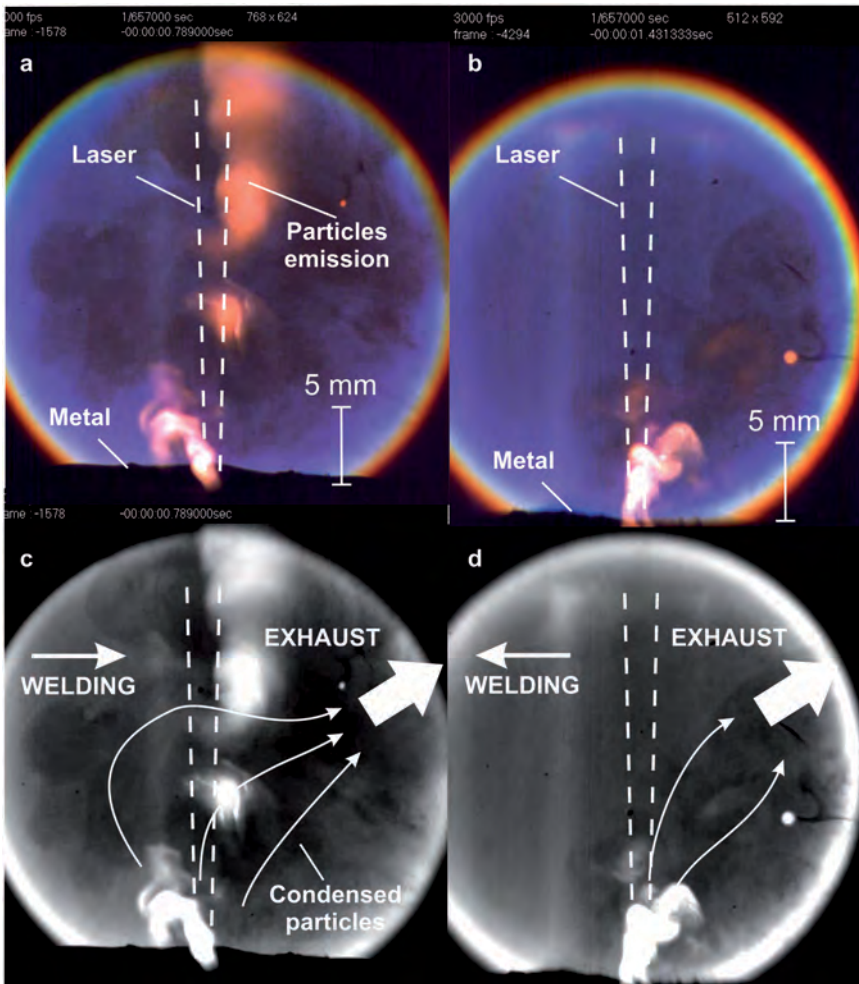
Images of the upper part of the welding plume during welding with front-exhaust (a) and rear-exhaust (b) (original images); (c,d) – highly contrasted images
